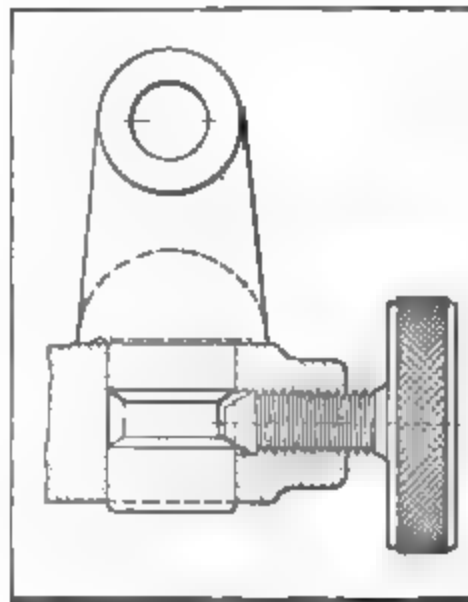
Clamping Screw with Pull-down Action for Clamping Bearing
